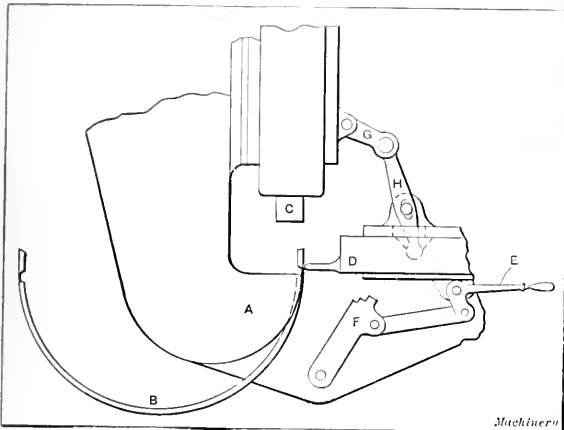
The Mechanism of the Rim-lug Bending Machine
